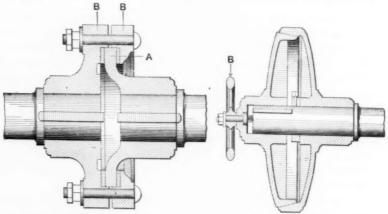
Ramsbottom Clutch Fig. 6 Cone Clutch
